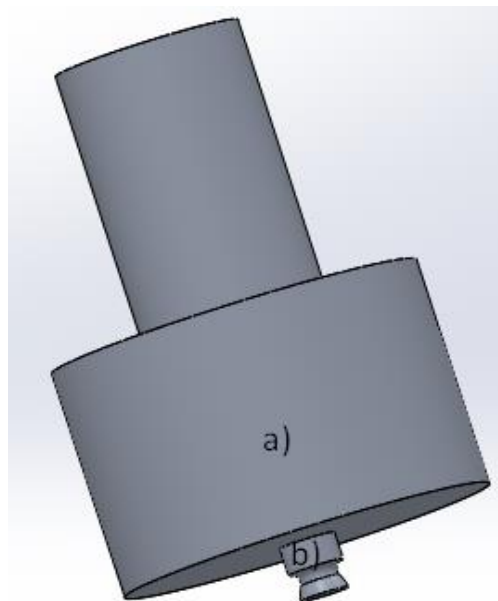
Conventional FSW tool (a) shoulder (b) probe.
